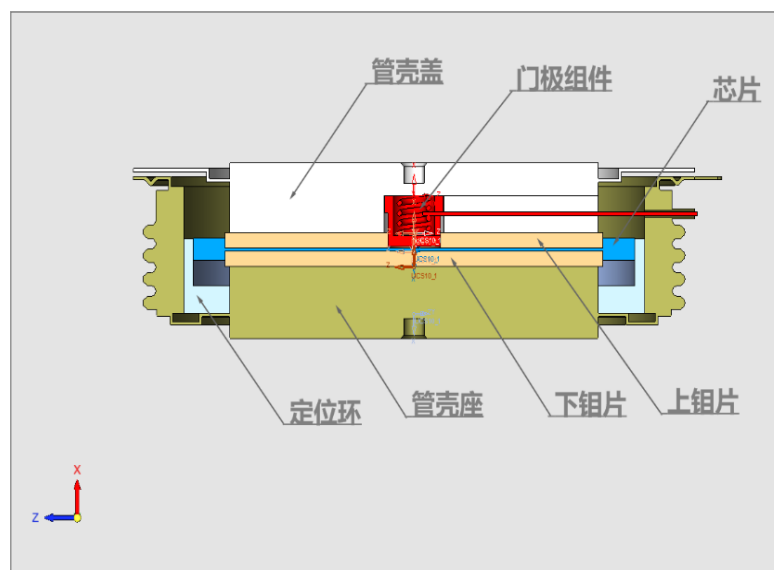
Cross-sectional view of fully crimped thyristor packaging
